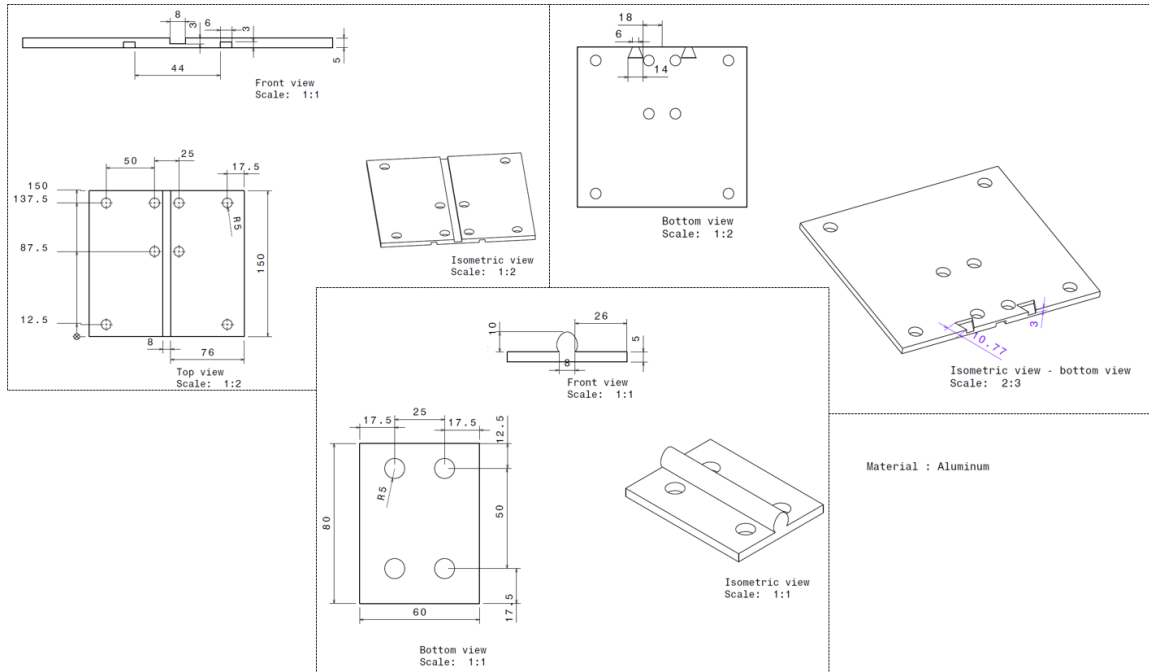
Drawings of the components to manufacture the fixed block of the translation stage setup.
